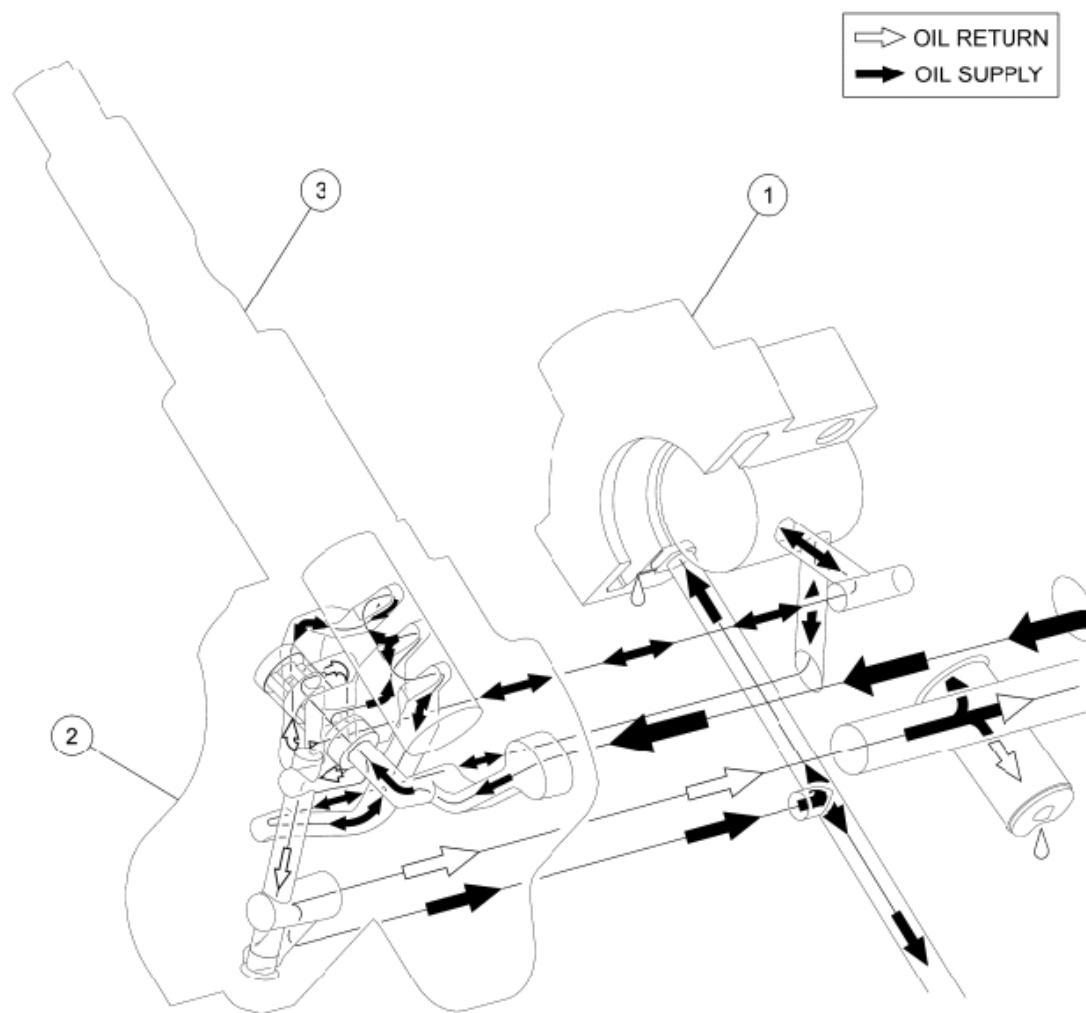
Identifying LH Variable Camshaft Timing (VCT) Housing, VCT Solenoid And Timing Chain Tensioner
